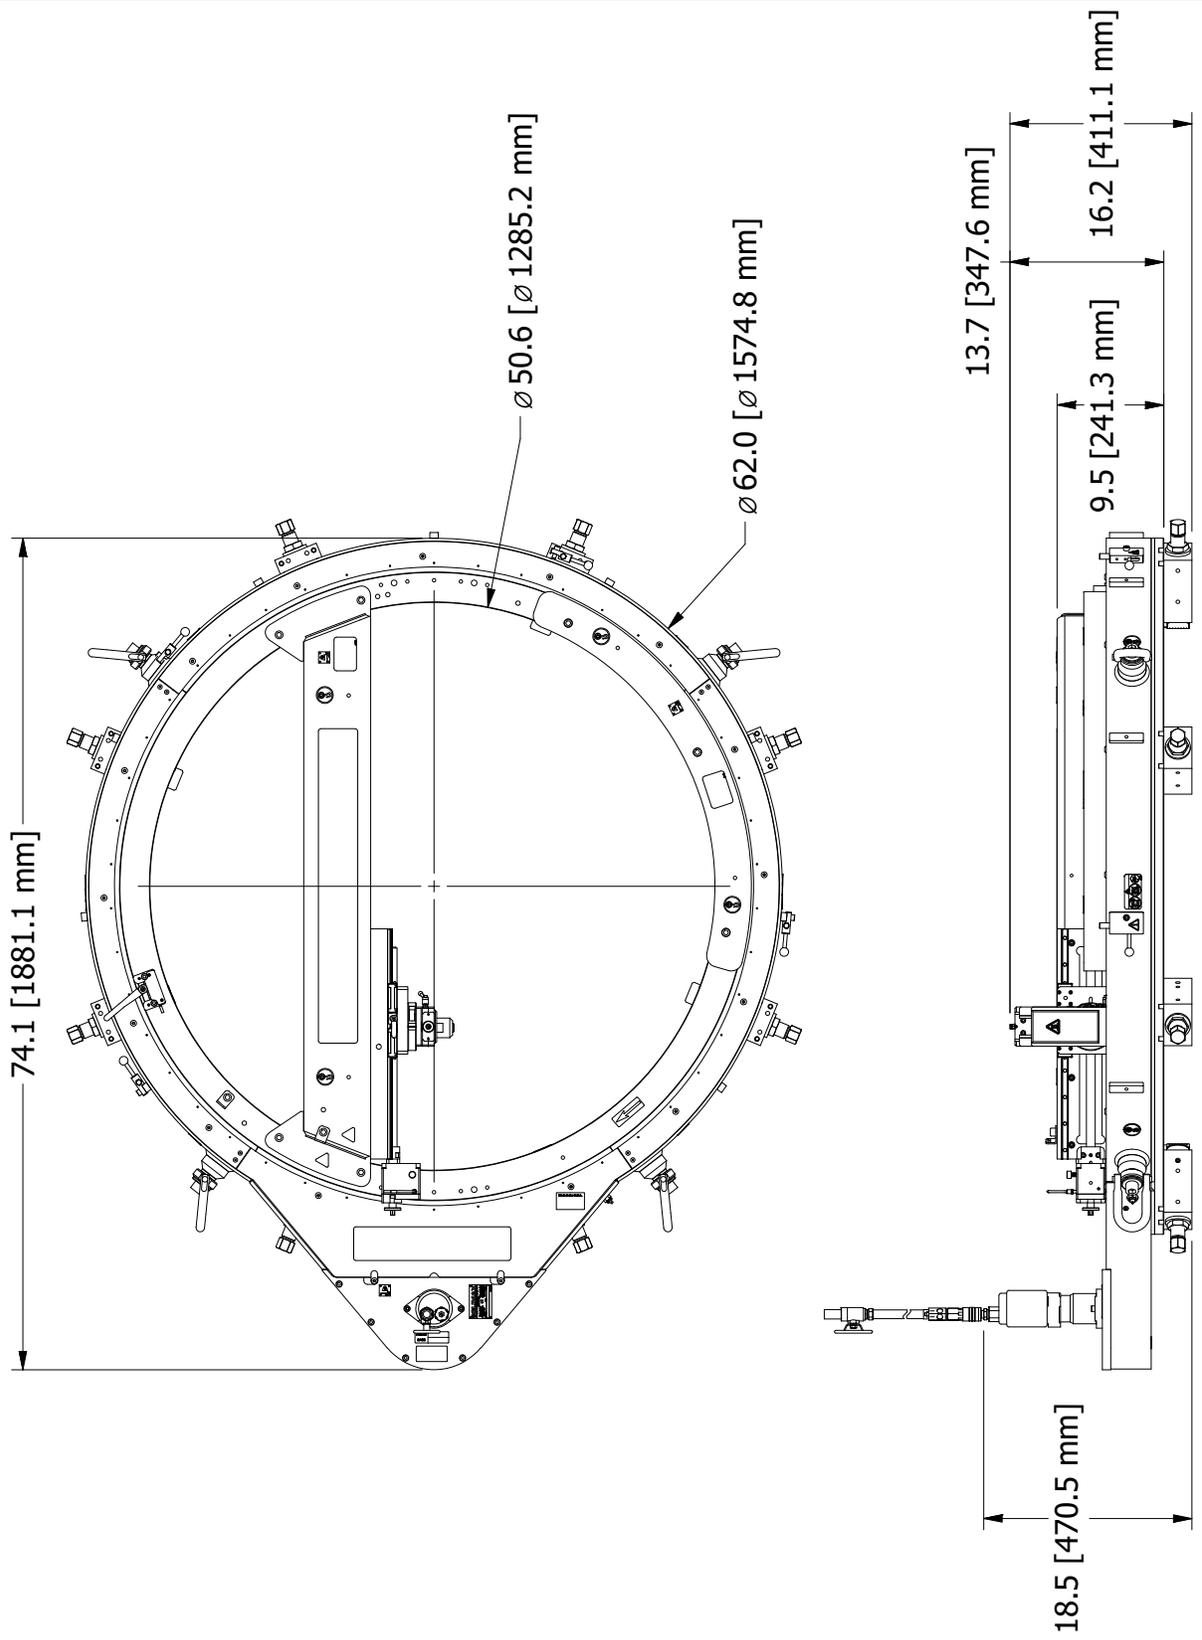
ODF50 SPEED FACER DIMENSIONS (RÉF. 86980)
